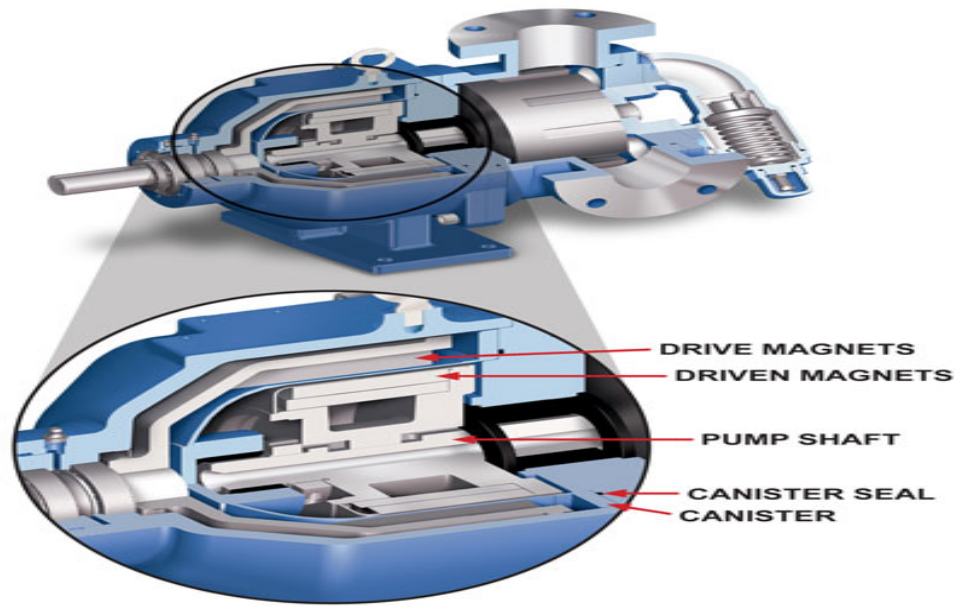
Exploded diagram of a magnetic drive pump (Viking Pump Inc., 2011)
